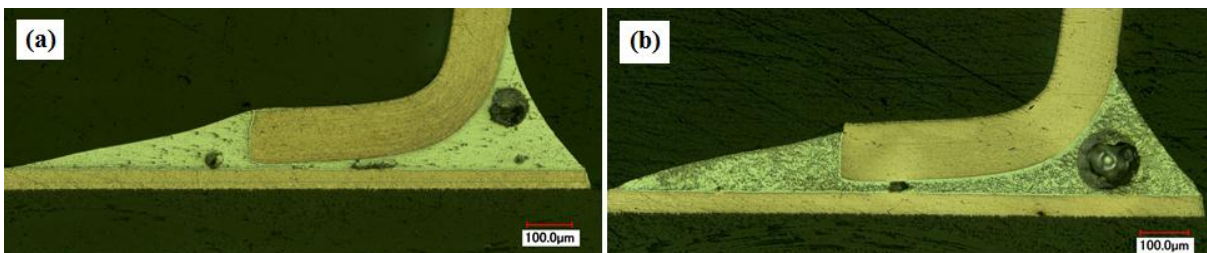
Sectional cuts of the QFP component's pins, in a product produced with N₂ in the Reflow soldering process (a), and in a product produced without N₂ in the Reflow soldering process (b).
